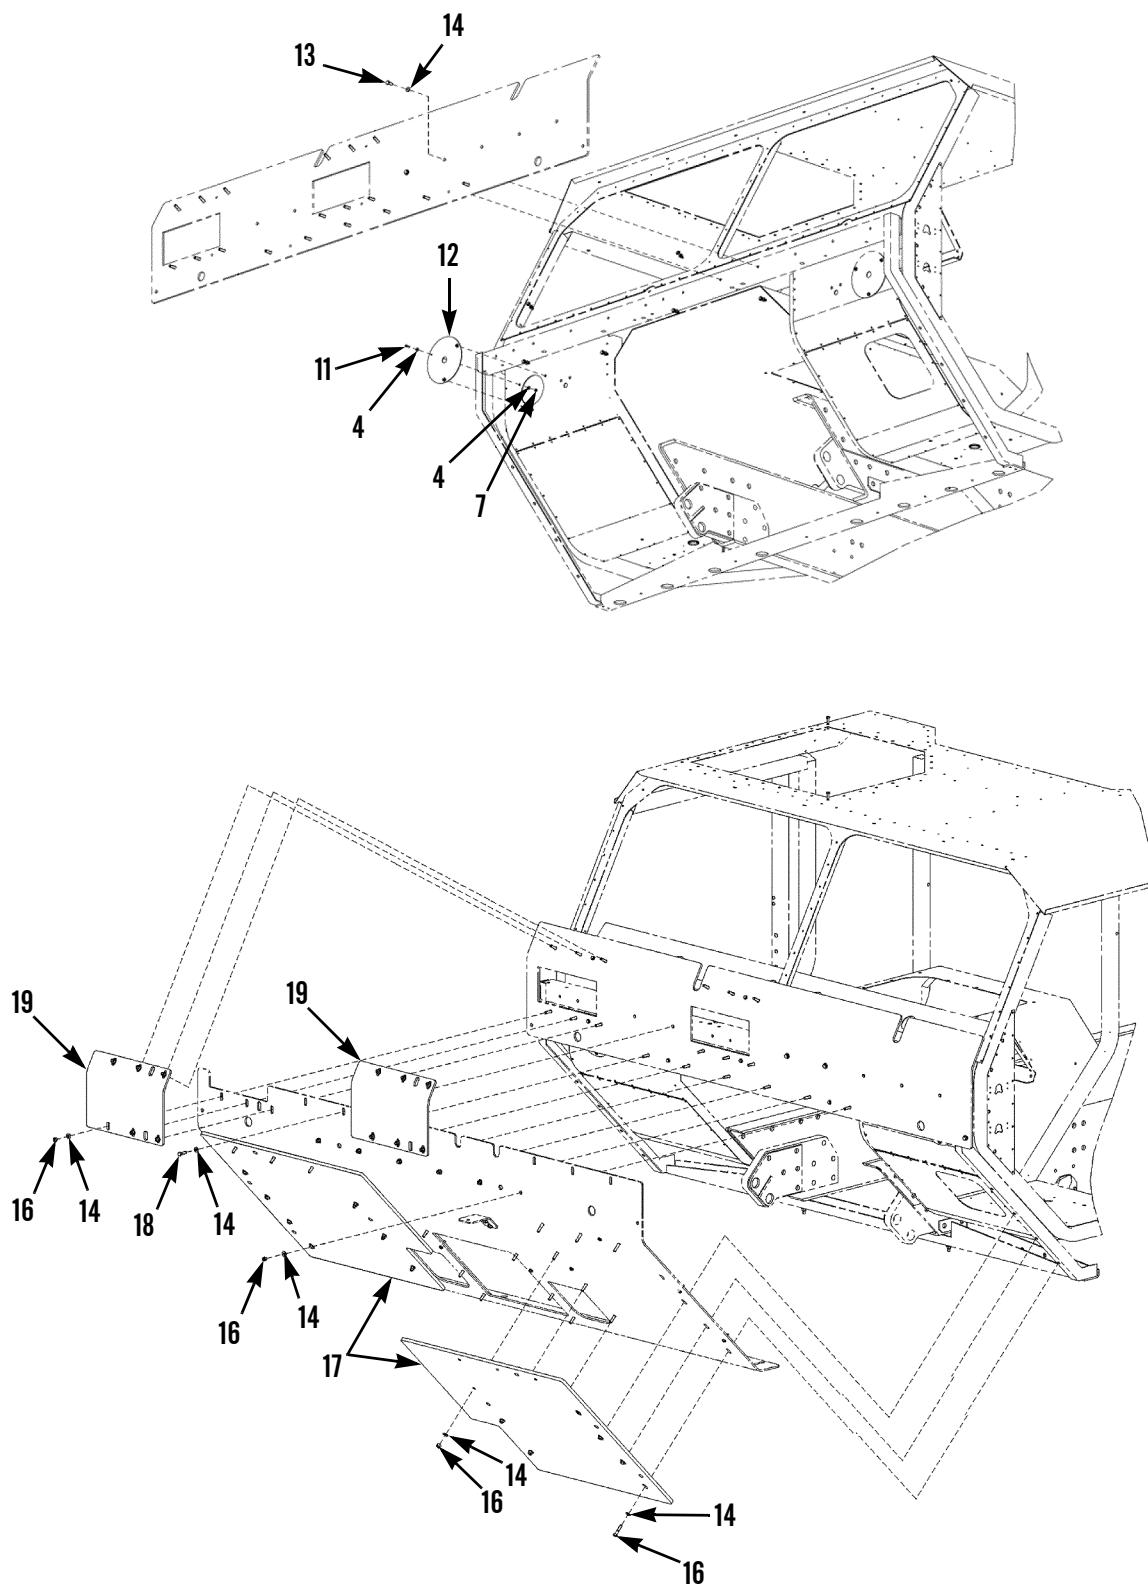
Front Armor Kit and Mounting Hardware (Sheet 2 of 4)
